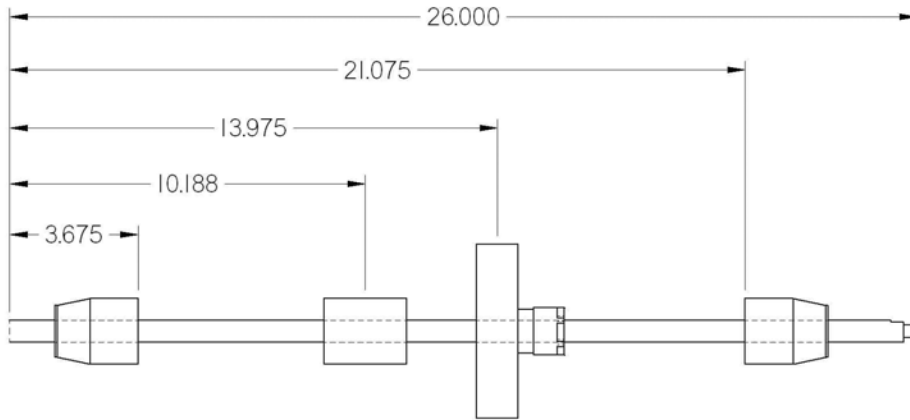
(b) Major dimensions in inches of the rotor assembly shown with conical magnetic bearing rotors, exciter's rotor and unbalance disk.
